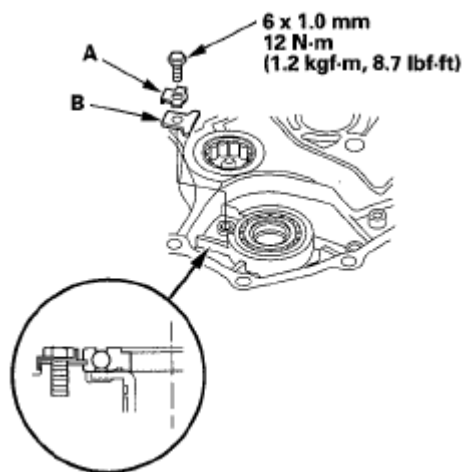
Identifying Lock Washer, Bearing Set Plate w/Torque Specification
